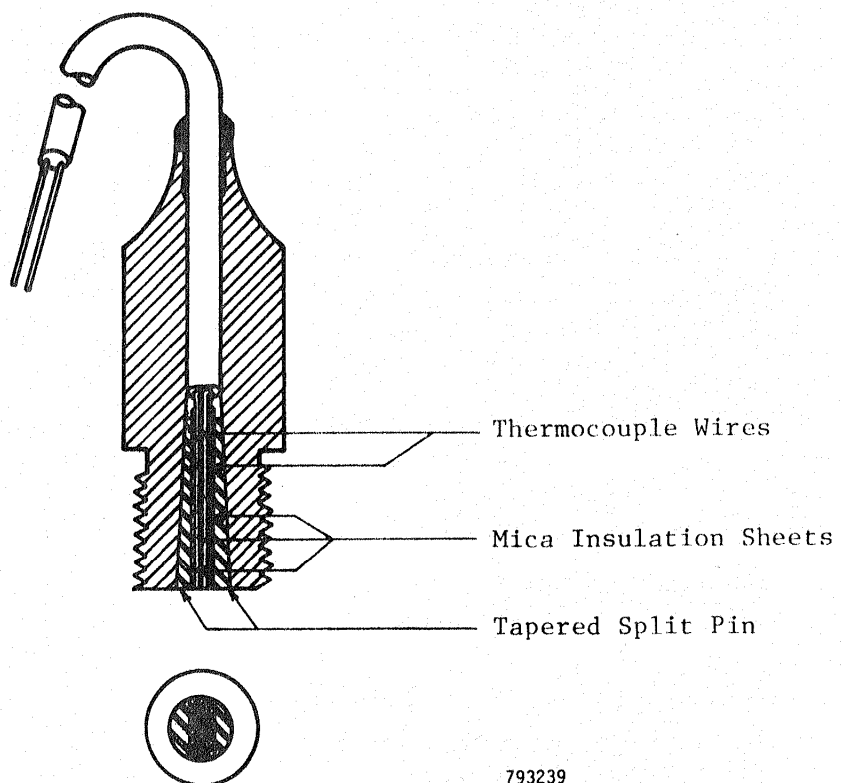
Cross-Sectional View of NANMAC Thermocouple
